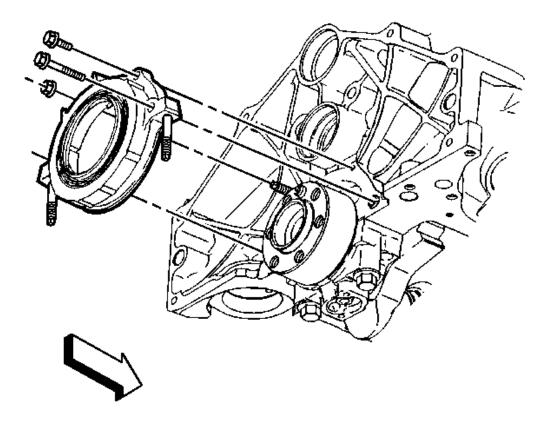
View Of Crankshaft Rear Oil Seal Housing Nuts & Bolts Courtesy of GENERAL MOTORS CORP.
